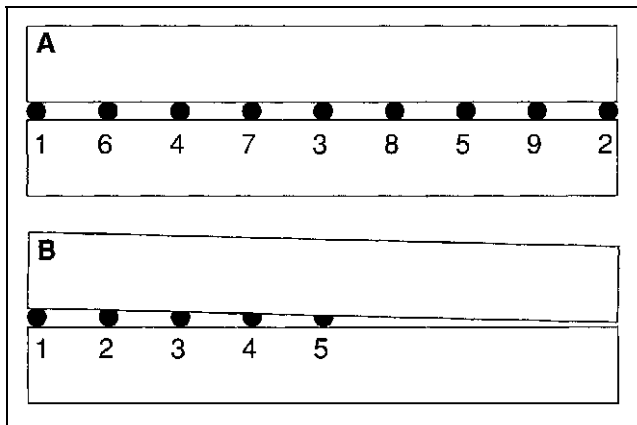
Tack weld sequence to provide uniform weld gap
